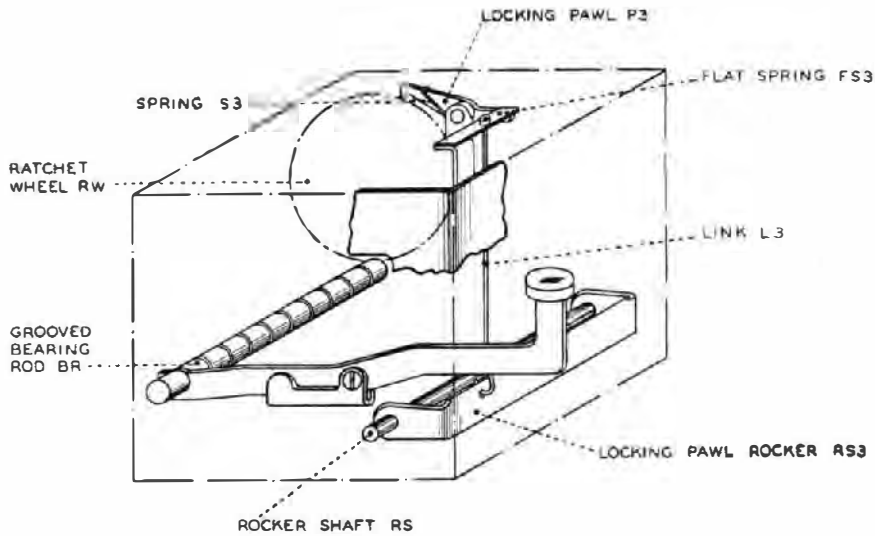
RATCHET WHEEL LOCKING PAWL.
